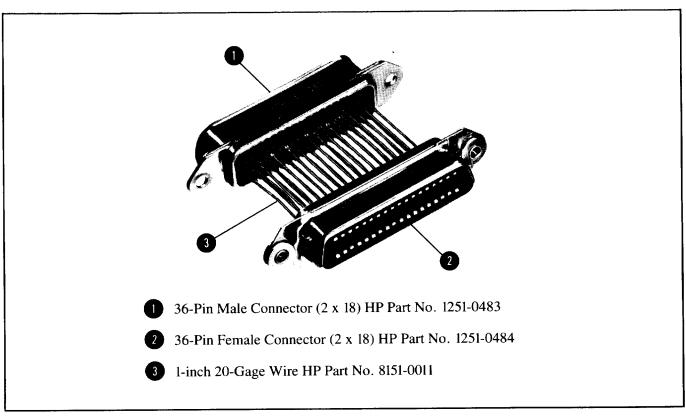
RF Section 36-Pin Extender, 08621-60056
